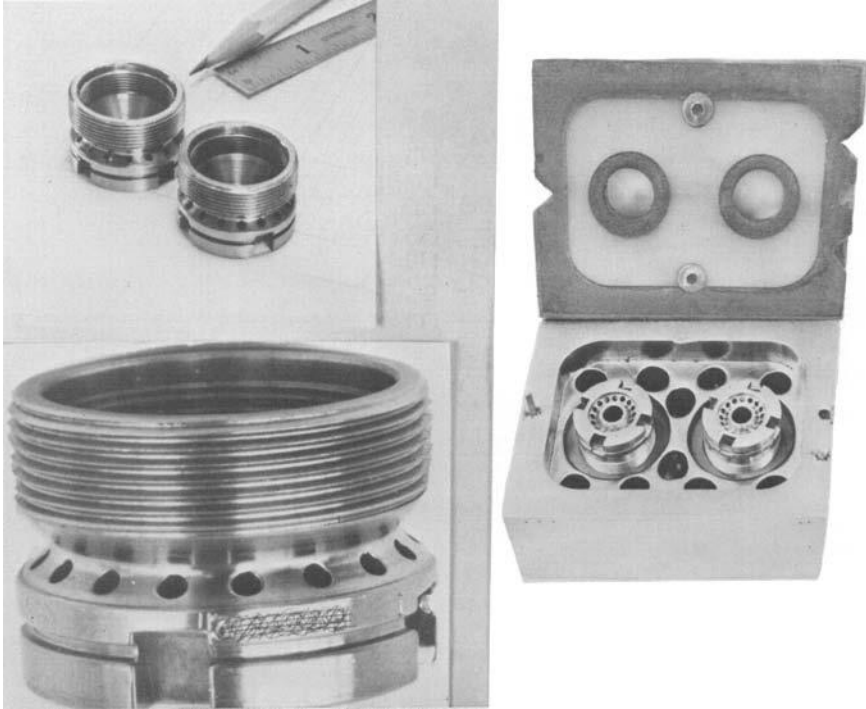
Stainless jet fuel spray nozzle and tooling. Holes to be deburred and radiused. Tooling shown at right.
